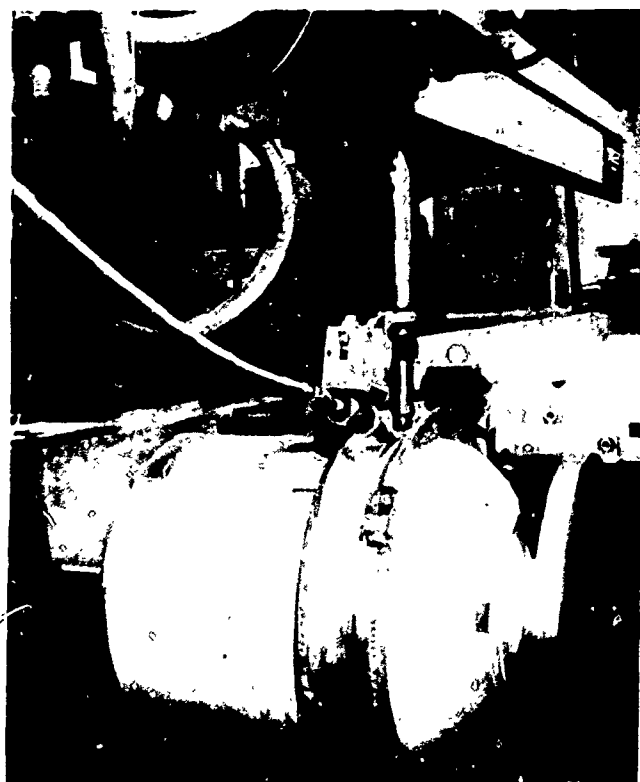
Welding Fixtures and Parts Ready for Dome-to-Barrel Weld, 2014 Aluminum Alloy
